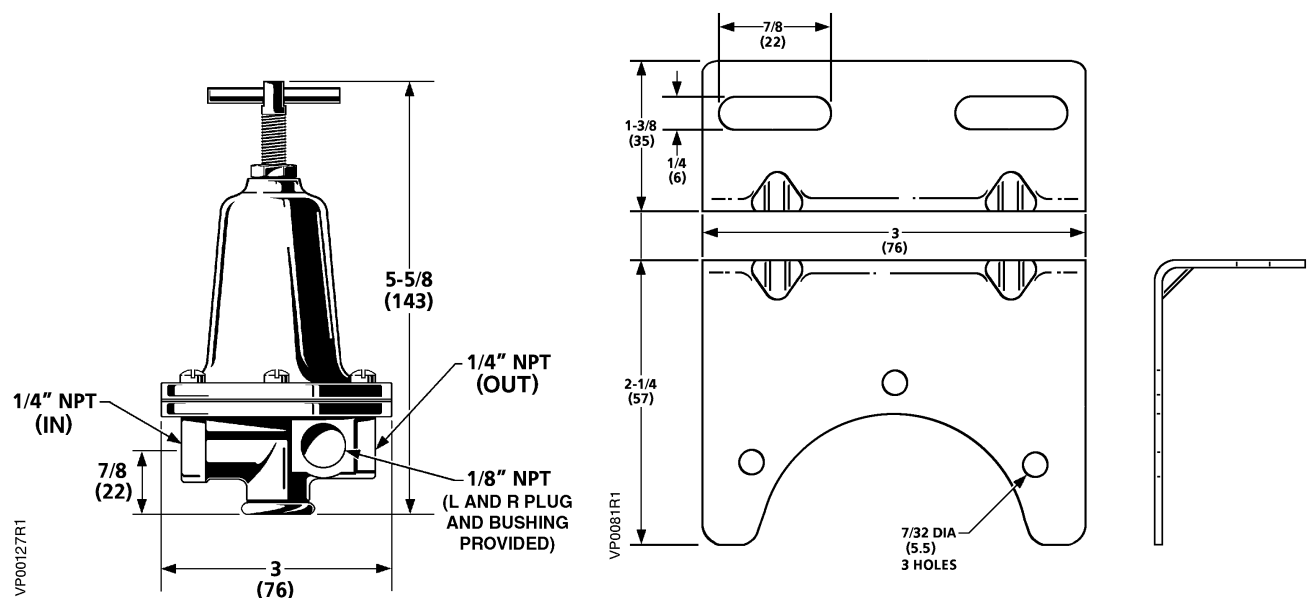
Pressure Reducing Valve and Mounting Bracket.
